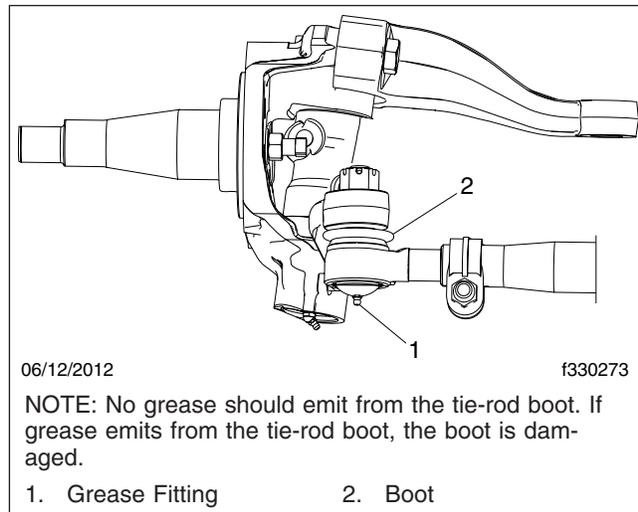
, Grease Fitting and Boot (Detroit axle shown)
